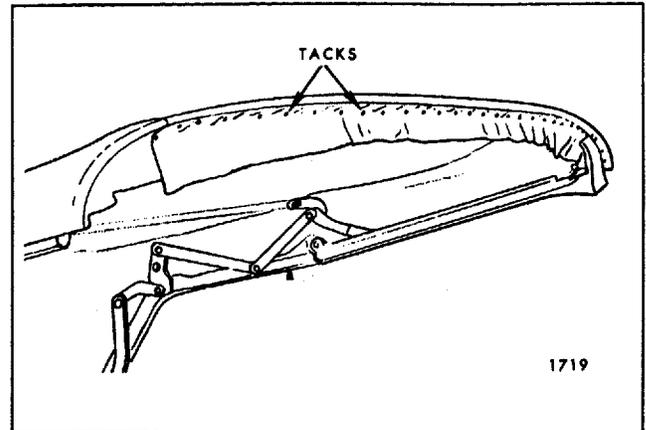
Installation Of Top Material To Front Roof Rail
